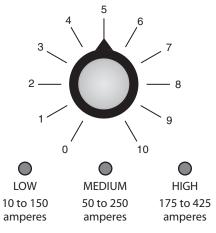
Welder power range taps and adjustment knob.
